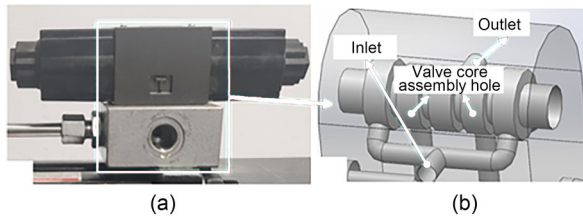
(a) Integration of the traditional prototype valve body and manifold block; (b) integrated valve body and manifold block integration
